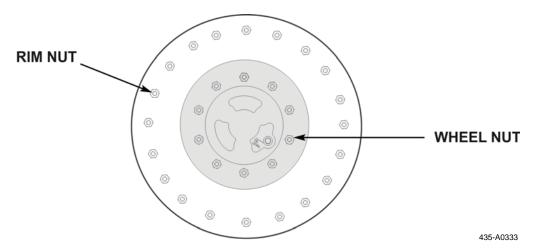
Road Wheel Rim Nuts and Wheel Nuts
